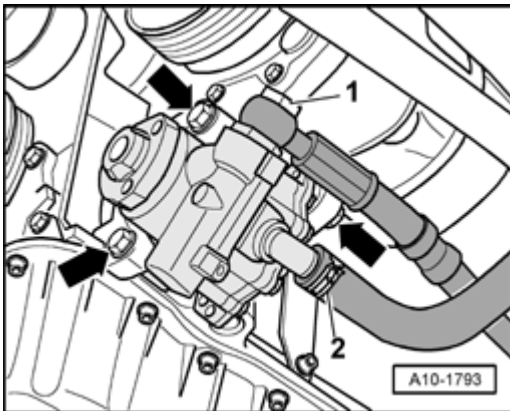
Removing Bolts And Power Steering Pump From Bracket
